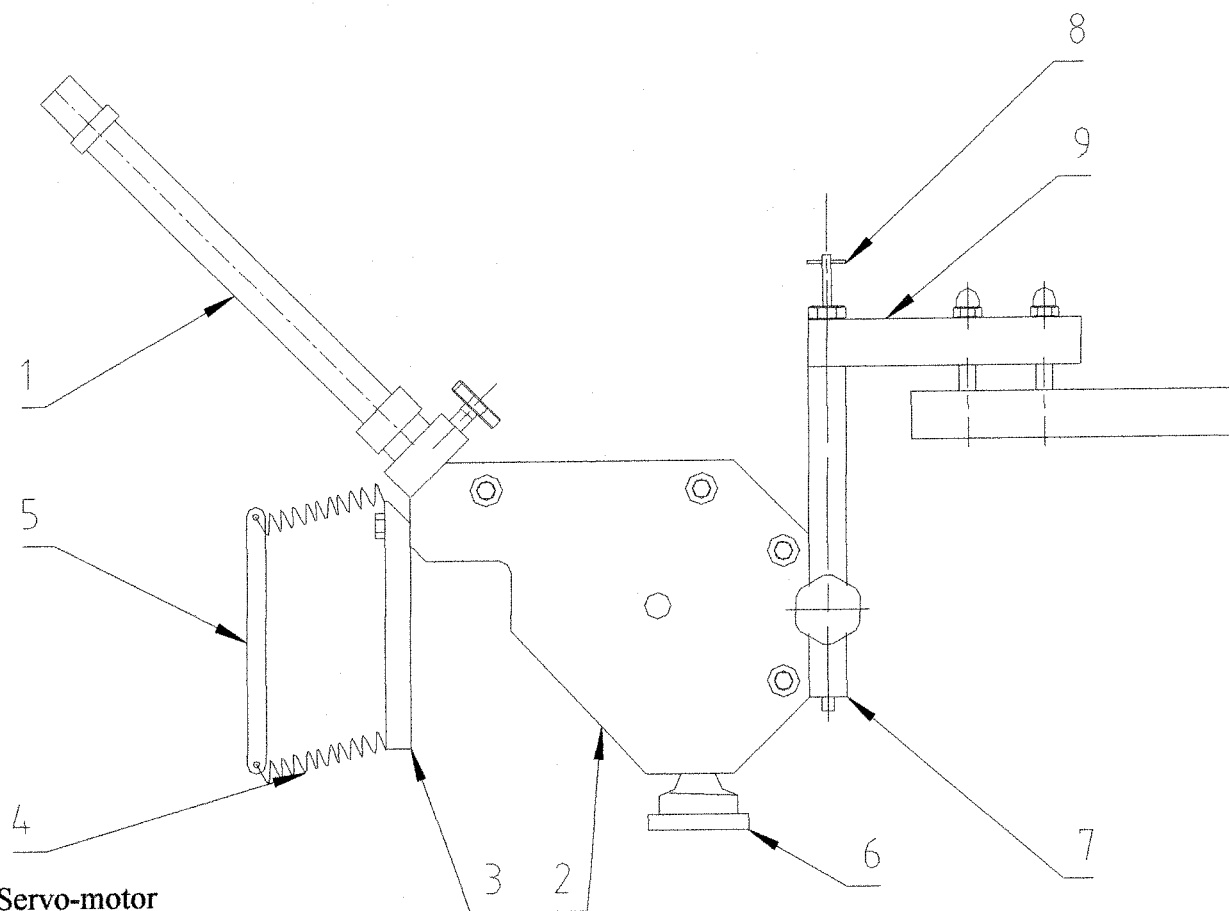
HORNS CLOSING DEVICE.
